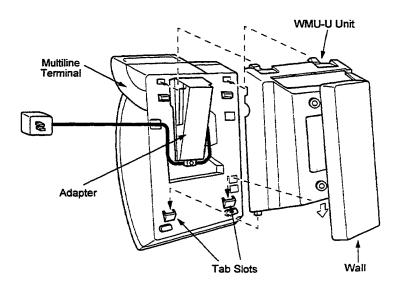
Attaching the Multiline Terminal to the WMU-U Unit
